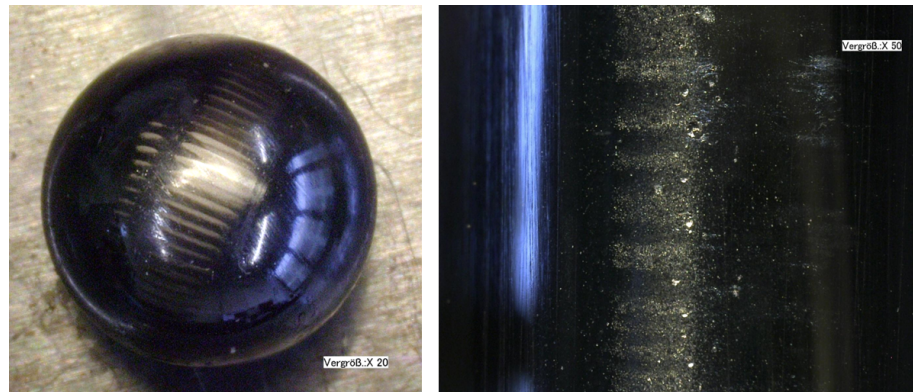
(left) Visual appearance of advanced fluting on a bearing ball. (right) Fluting at an early stage on a deep groove ball bearing inner ring [23].
